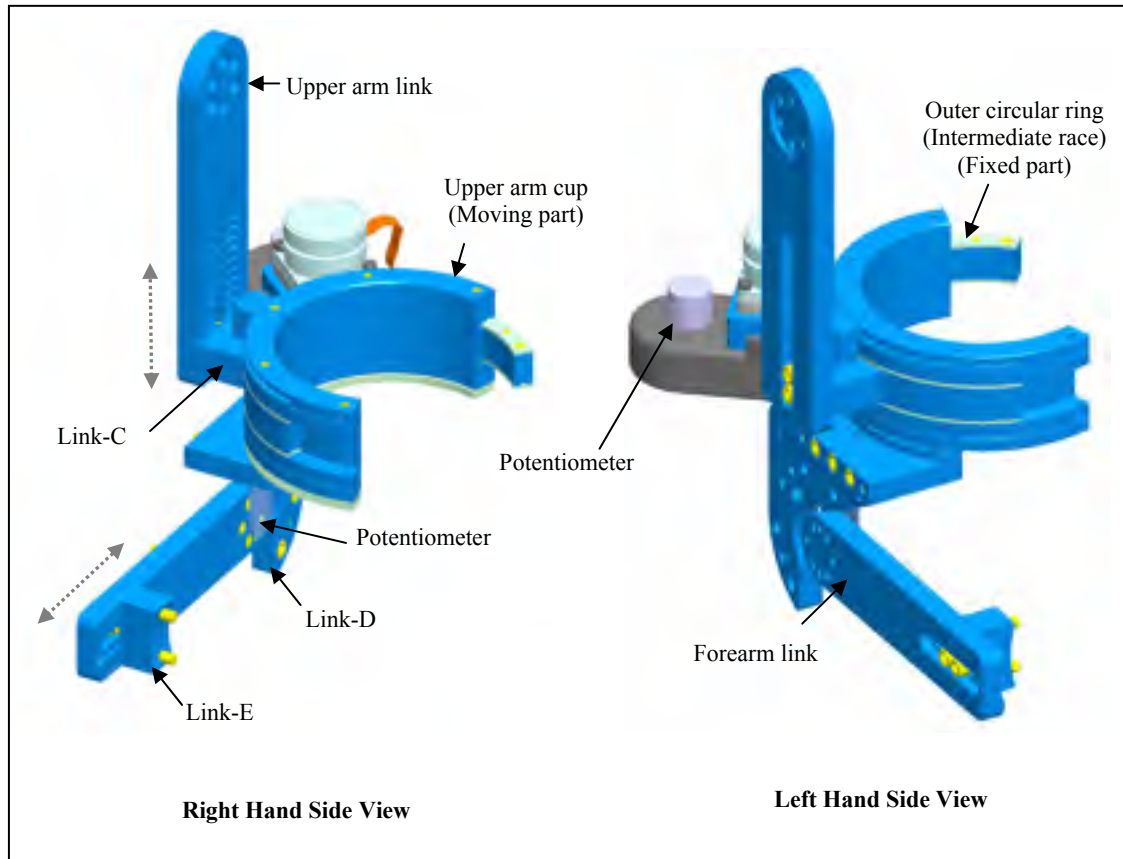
Shoulder joint internal/external rotation support part (when elbow motor is unplugged from elbow joint)
